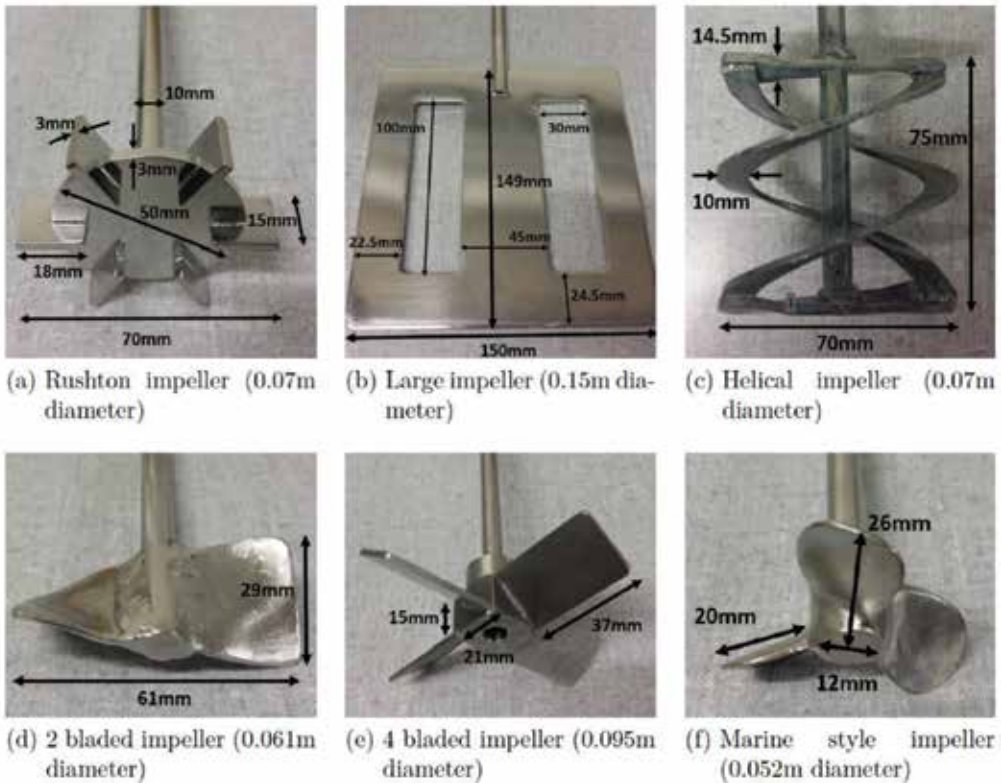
Impeller photographs and their dimensions. (a) Rushton impeller; (b) Large impeller; (c) Helical impeller; (d) Two bladed impeller; (e) Four bladed impeller; (f) Marine style impeller.
